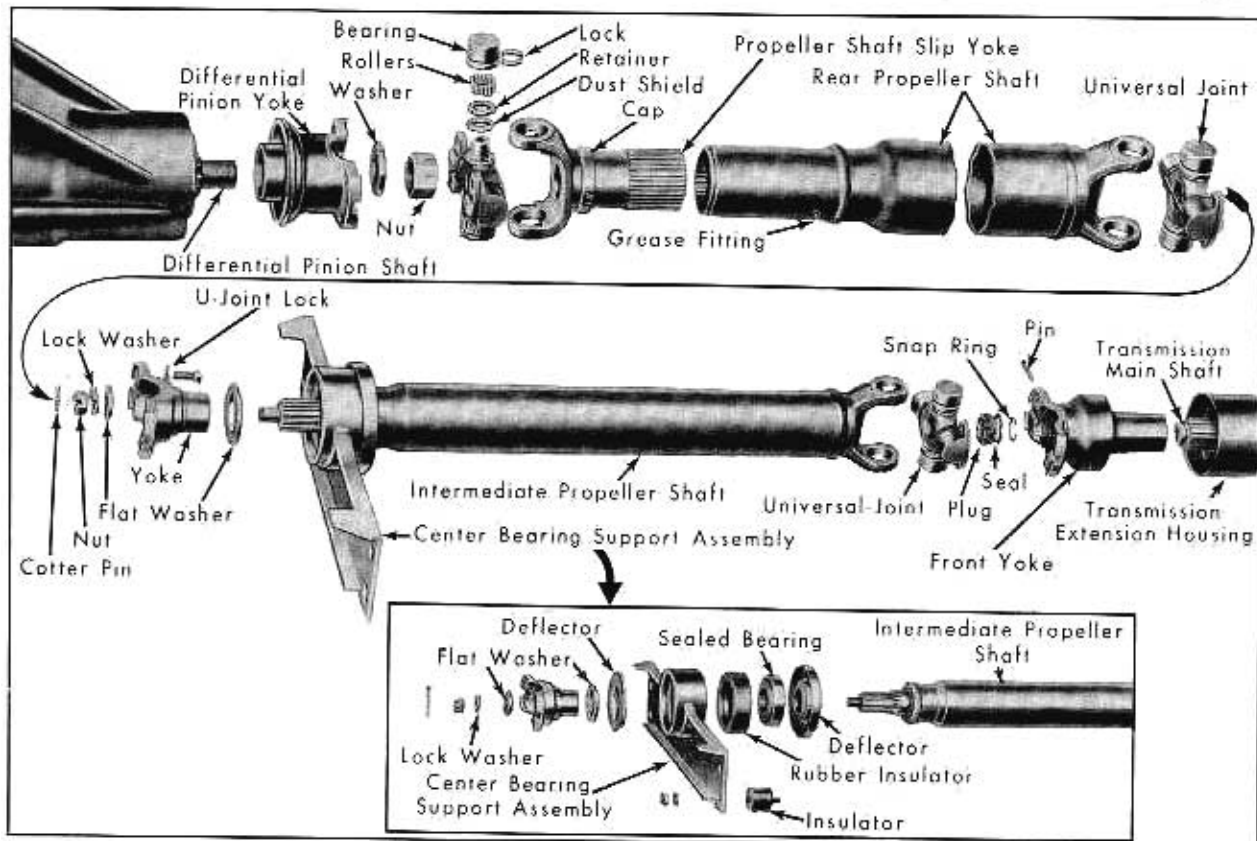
Series 75 and 86 Propeller Shafts - Disassembled
